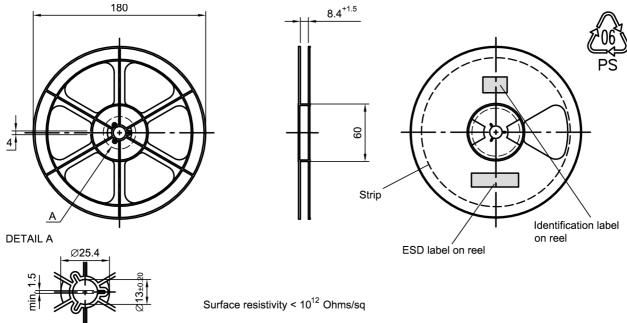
Drawing of reel (first-angle projection) with diameter of 180 mm.
